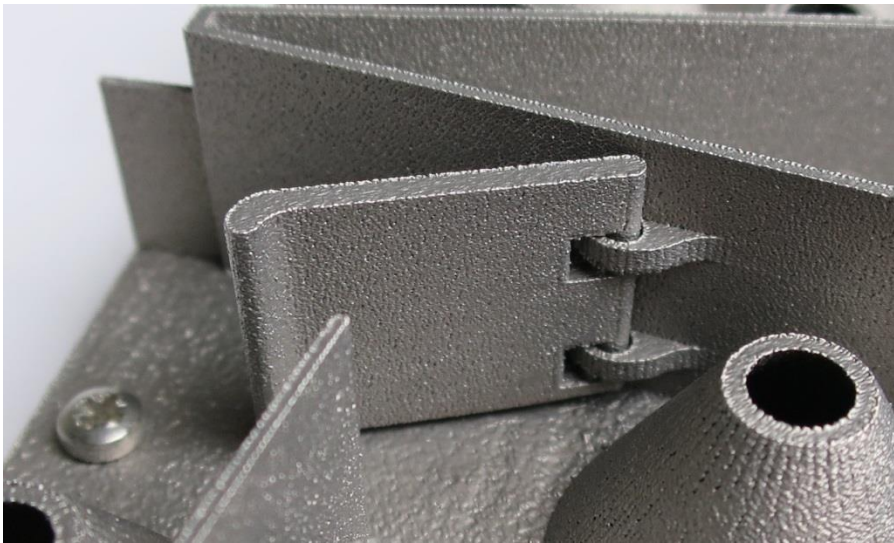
Hinge assembly manufactured in one shot with LBM (Source: Fraunhofer IWU)
